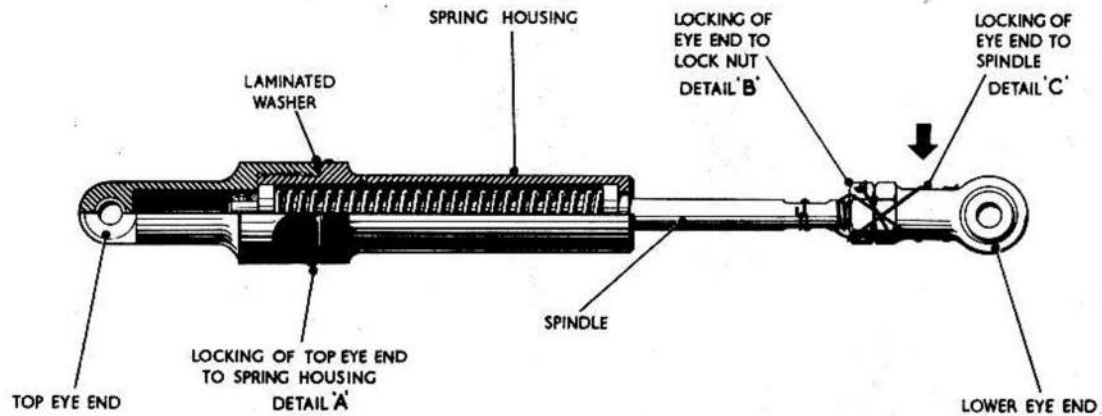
SPRING UNIT - FLYING TAIL SWITCH GEAR
